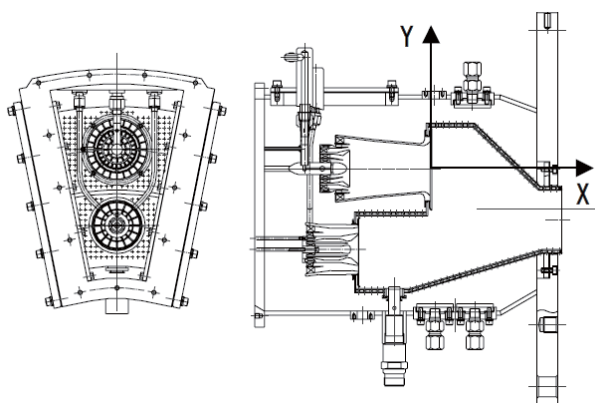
Schematic drawing of single sector combustor of ESPR project
